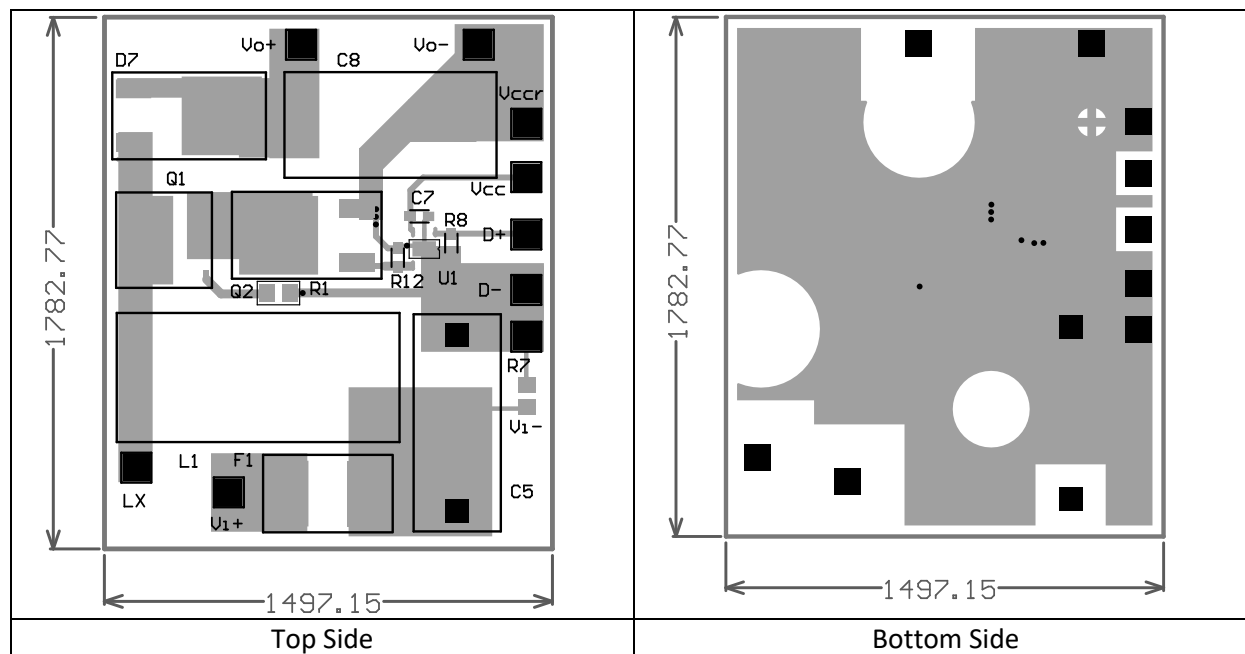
HF Boost Power Stage with Air Core Inductor PCB Layout
